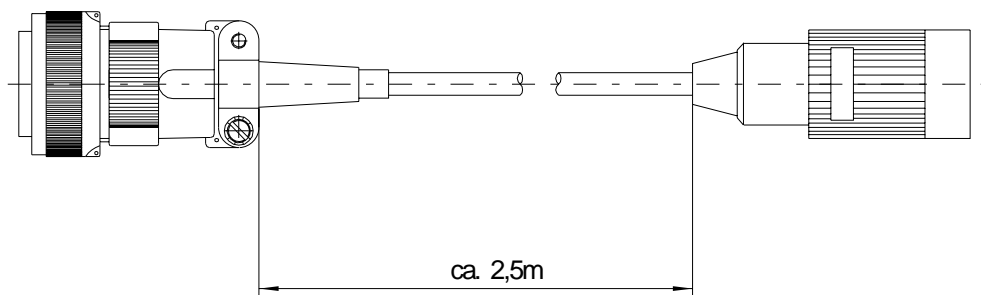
Dimensional Drawing Adapter Control DC 1-03 – HP 03
